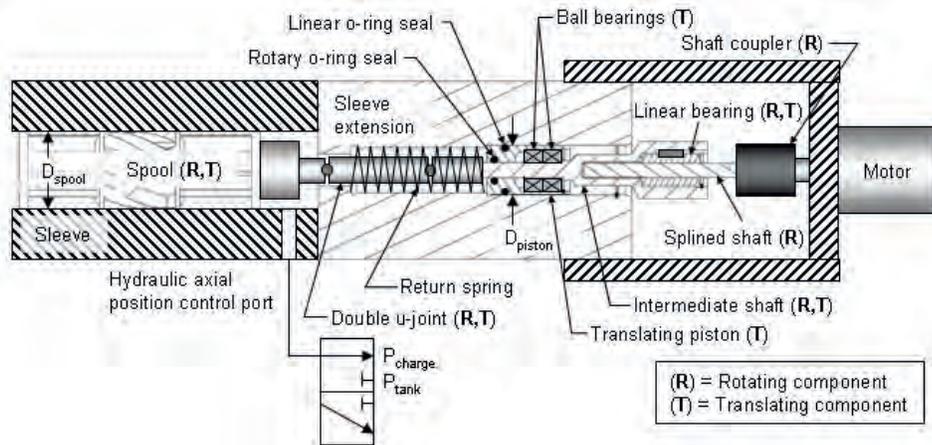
Schematic of 2 DOF external rotary valve driving mechanism
